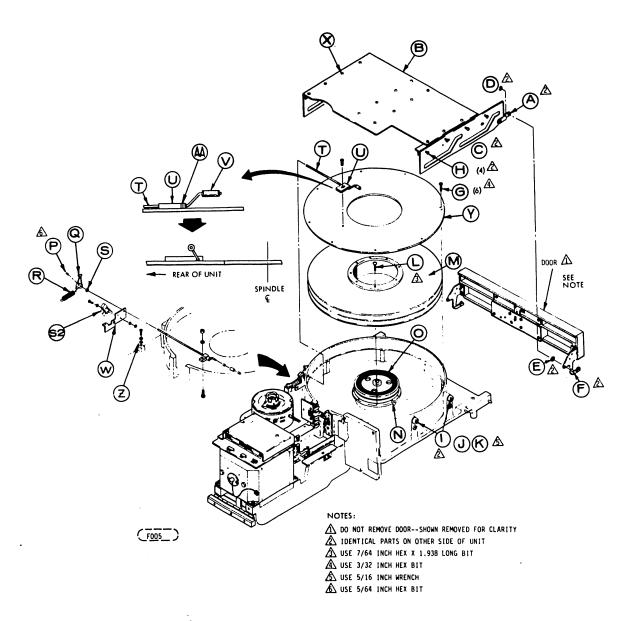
REMOVAL OF RECEIVER PLATE ASSEMBLY AND FIXED DISK PACK
